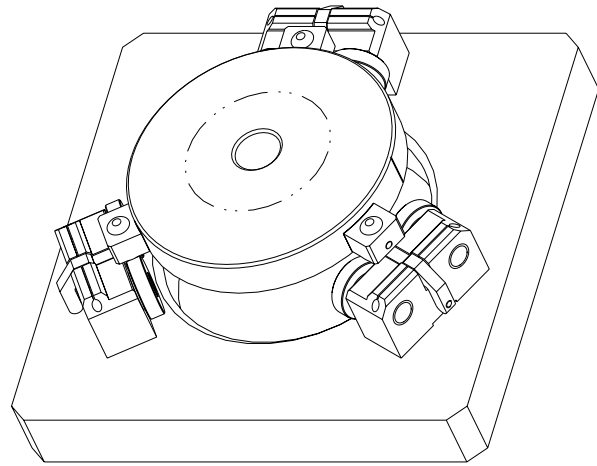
The M1 metrology mount uses pairs of rolling-element bearings to form a three-vee kinematic coupling.
